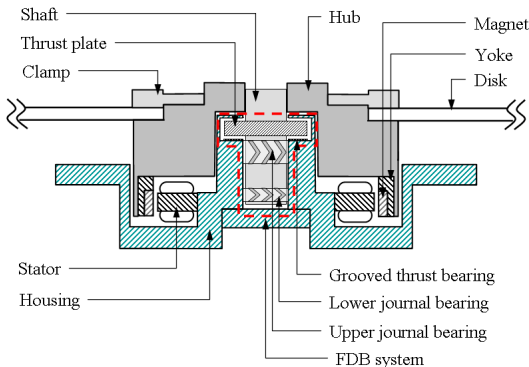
Mechanical structure of a 3.5" HDD disk-spindle system
